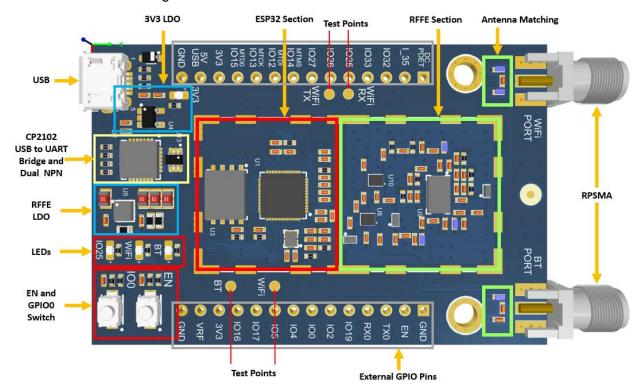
PCB component placement and external connectors on top layer, and at the bottom layer is outline for heat shield.
